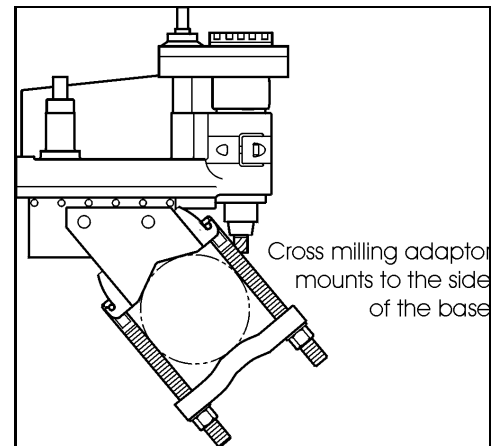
CROSS MILLING ADAPTER MOUNTS TO THE SIDE OF THE BASE
